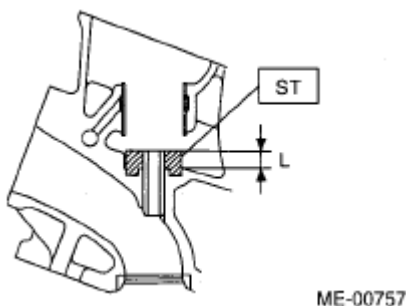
Identifying Valve Guide Adjuster ST 18251AA020 On Cylinder Head
